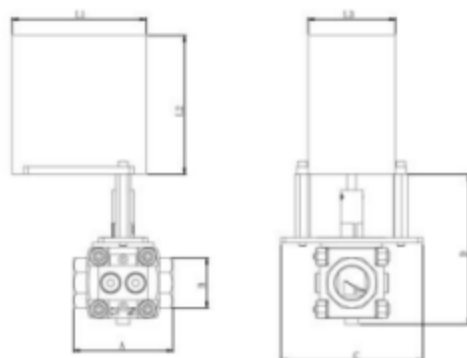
Structure diagram of Thread connection +AT31 Actuator
